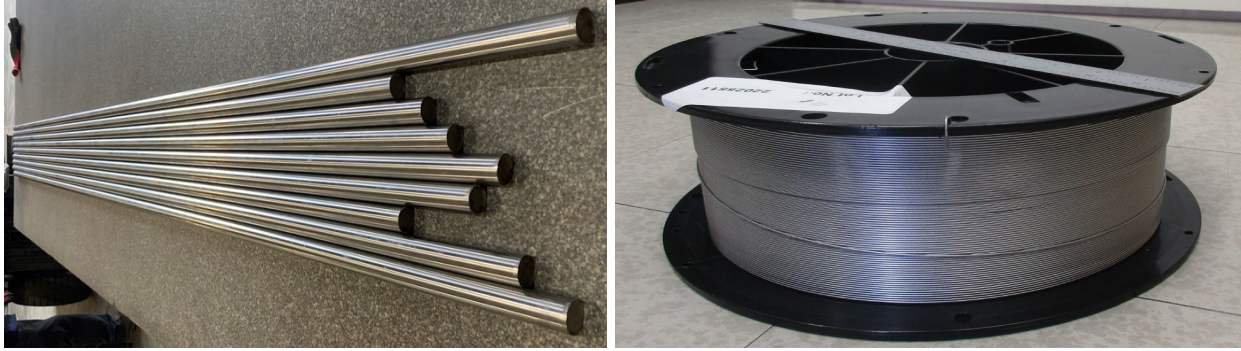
The 1 in. dia. rods (left) and 0.45 in. dia. welding wires (right) from the 0.25-ton heat..
